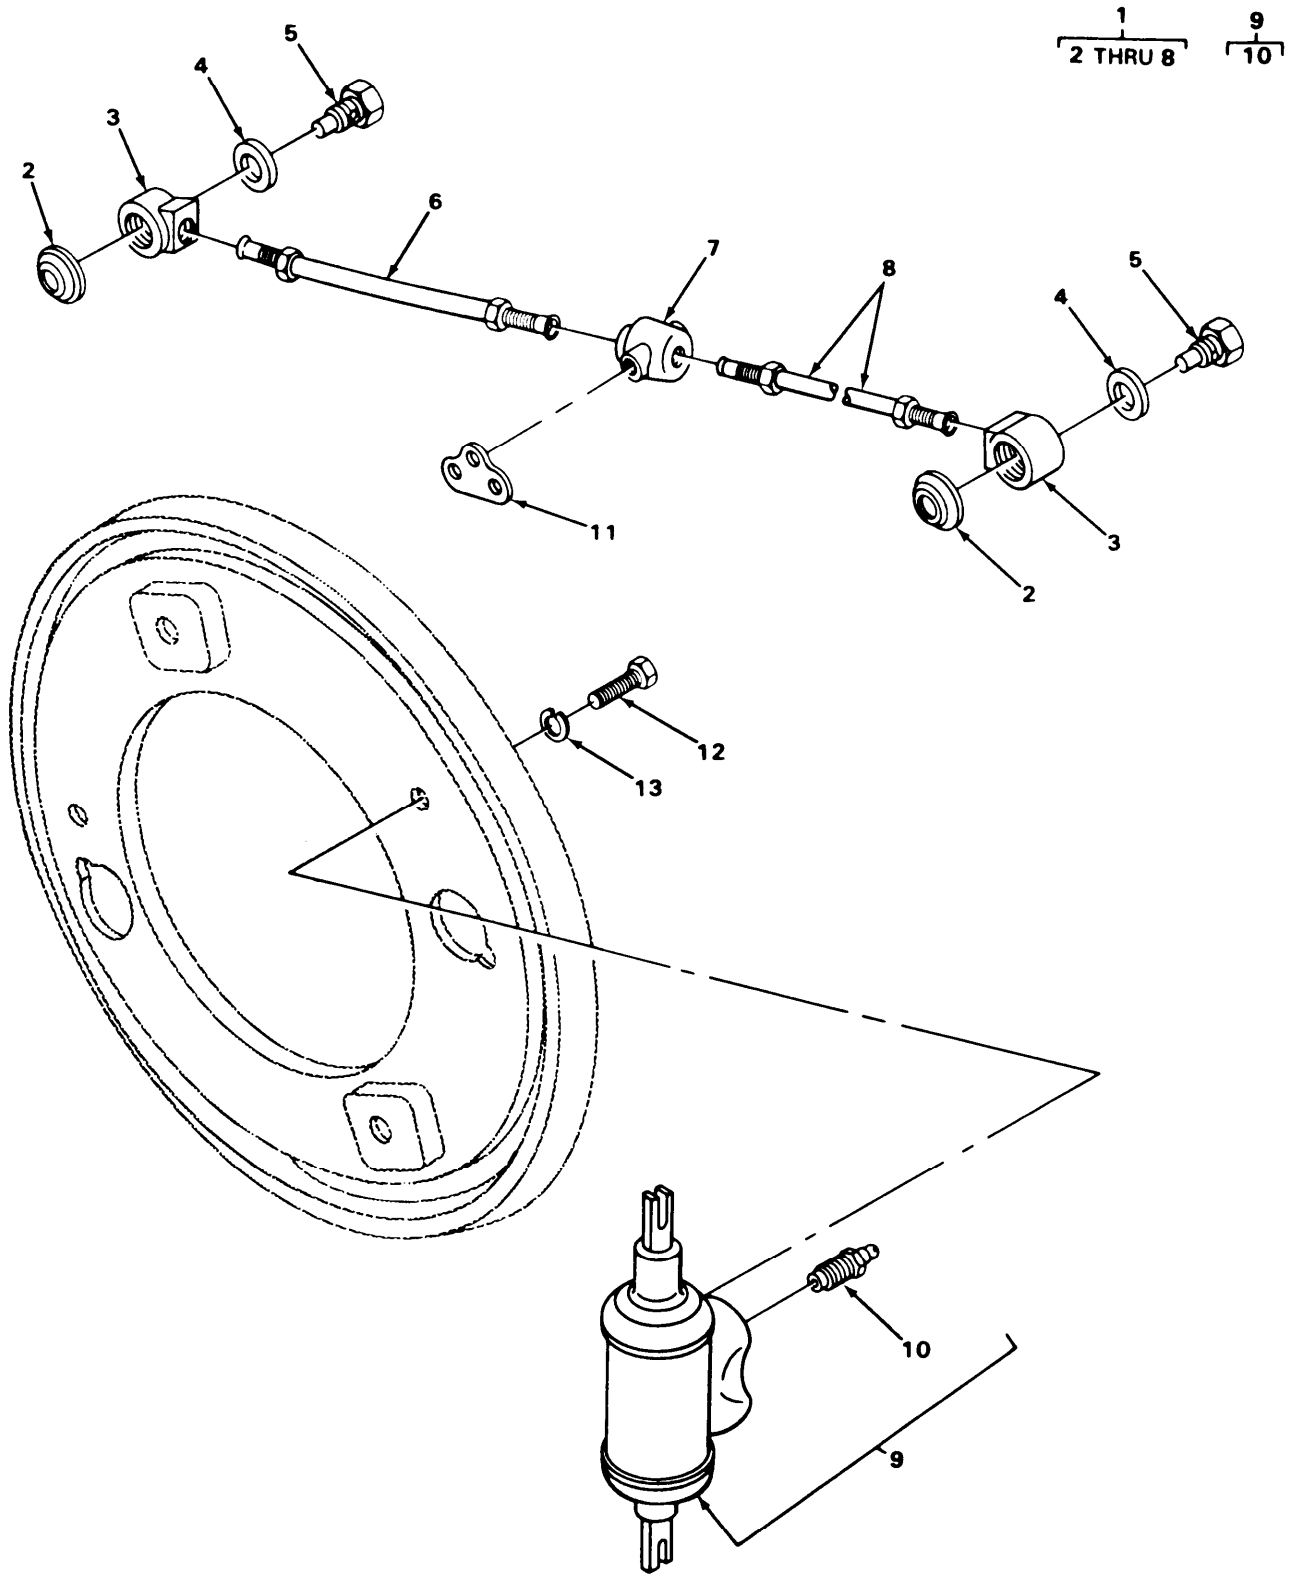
MASTER CYLINDER HYDRAULIC BRAKE ASSEMBLY.
